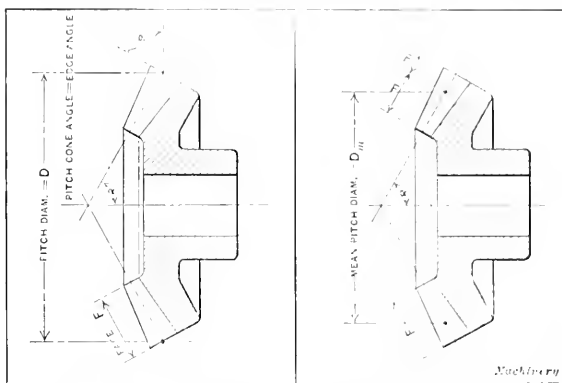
Gear Dimensions required to determine Radial Pressure and End Thrust
